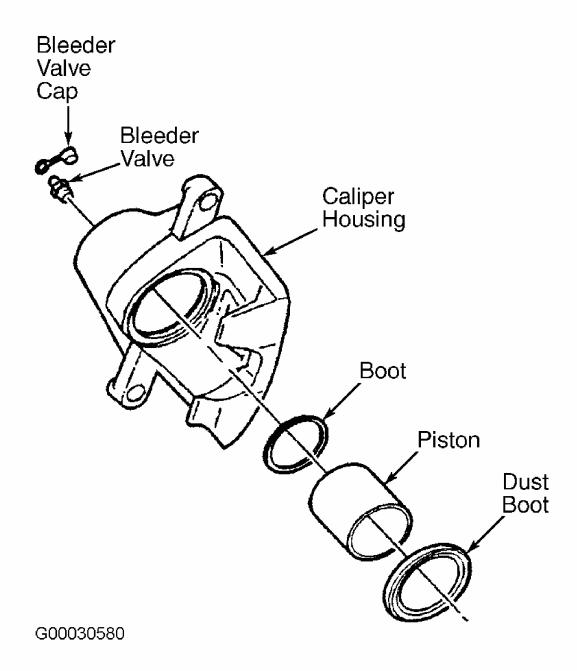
Exploded View Of Single Piston Caliper Assembly (Typical) Courtesy of GENERAL MOTORS CORP.
